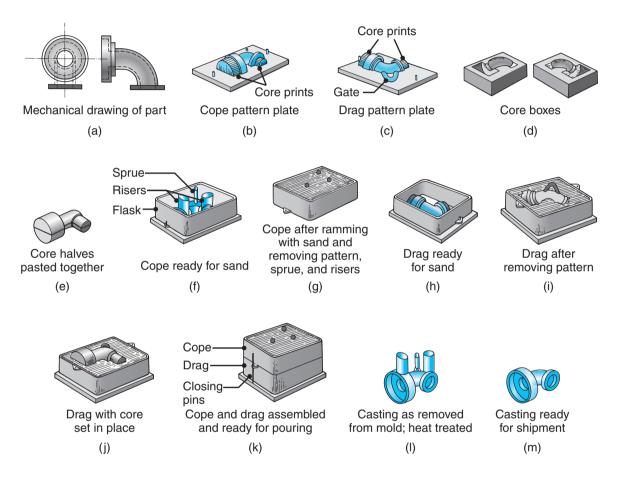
Schematic illustration of the sequence of operations for sand casting. (a) A mechanical drawing or CAD representation of the part is used to generate a design for the pattern. Considerations such as part shrinkage and draft must be included into the drawing. (b–c) Patterns have been mounted on plates equipped with pins for alignment. Note also the presence of core prints designed to hold the core in place. (d–e) Core boxes produce core halves, which are pasted together. The cores will be used to produce the hollow area of the part shown in (a). (f) The cope half of the mold is assembled by securing the cope pattern plate to the flask with aligning pins and attaching inserts to form the sprue and risers. (g) The flask is rammed with sand, and the plate and inserts are removed. (h) The drag half is produced in a similar manner, with the pattern inserted. A bottom board is placed below the drag and is aligned with pins. (i) The pattern, flask, and bottom board are inverted, and the pattern is withdrawn, leaving the appropriate imprint. (j) The core is set in place within the drag cavity. (k) The mold is closed by placing the cope on top of the drag and securing the assembly with pins. The flasks are then subjected to pressure to counteract buoyant forces in the molten metal, which might lift the cope. (l) After the metal solidifies, the casting is removed from the mold. (m) The sprue and risers are cut off and recycled, and the casting is cleaned, inspected, and heat treated (if necessary). *Source:* Courtesy of Steel Founders' Society of America.
